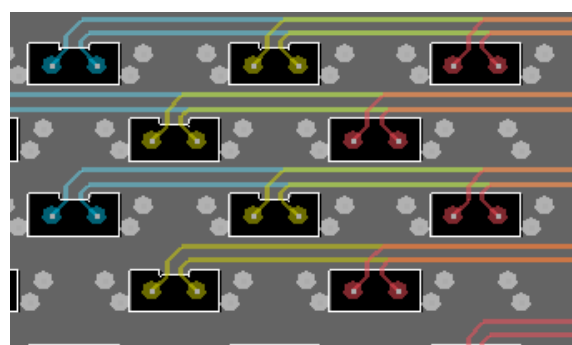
Example of dog bone pads showing top layer copper and its solder mask
